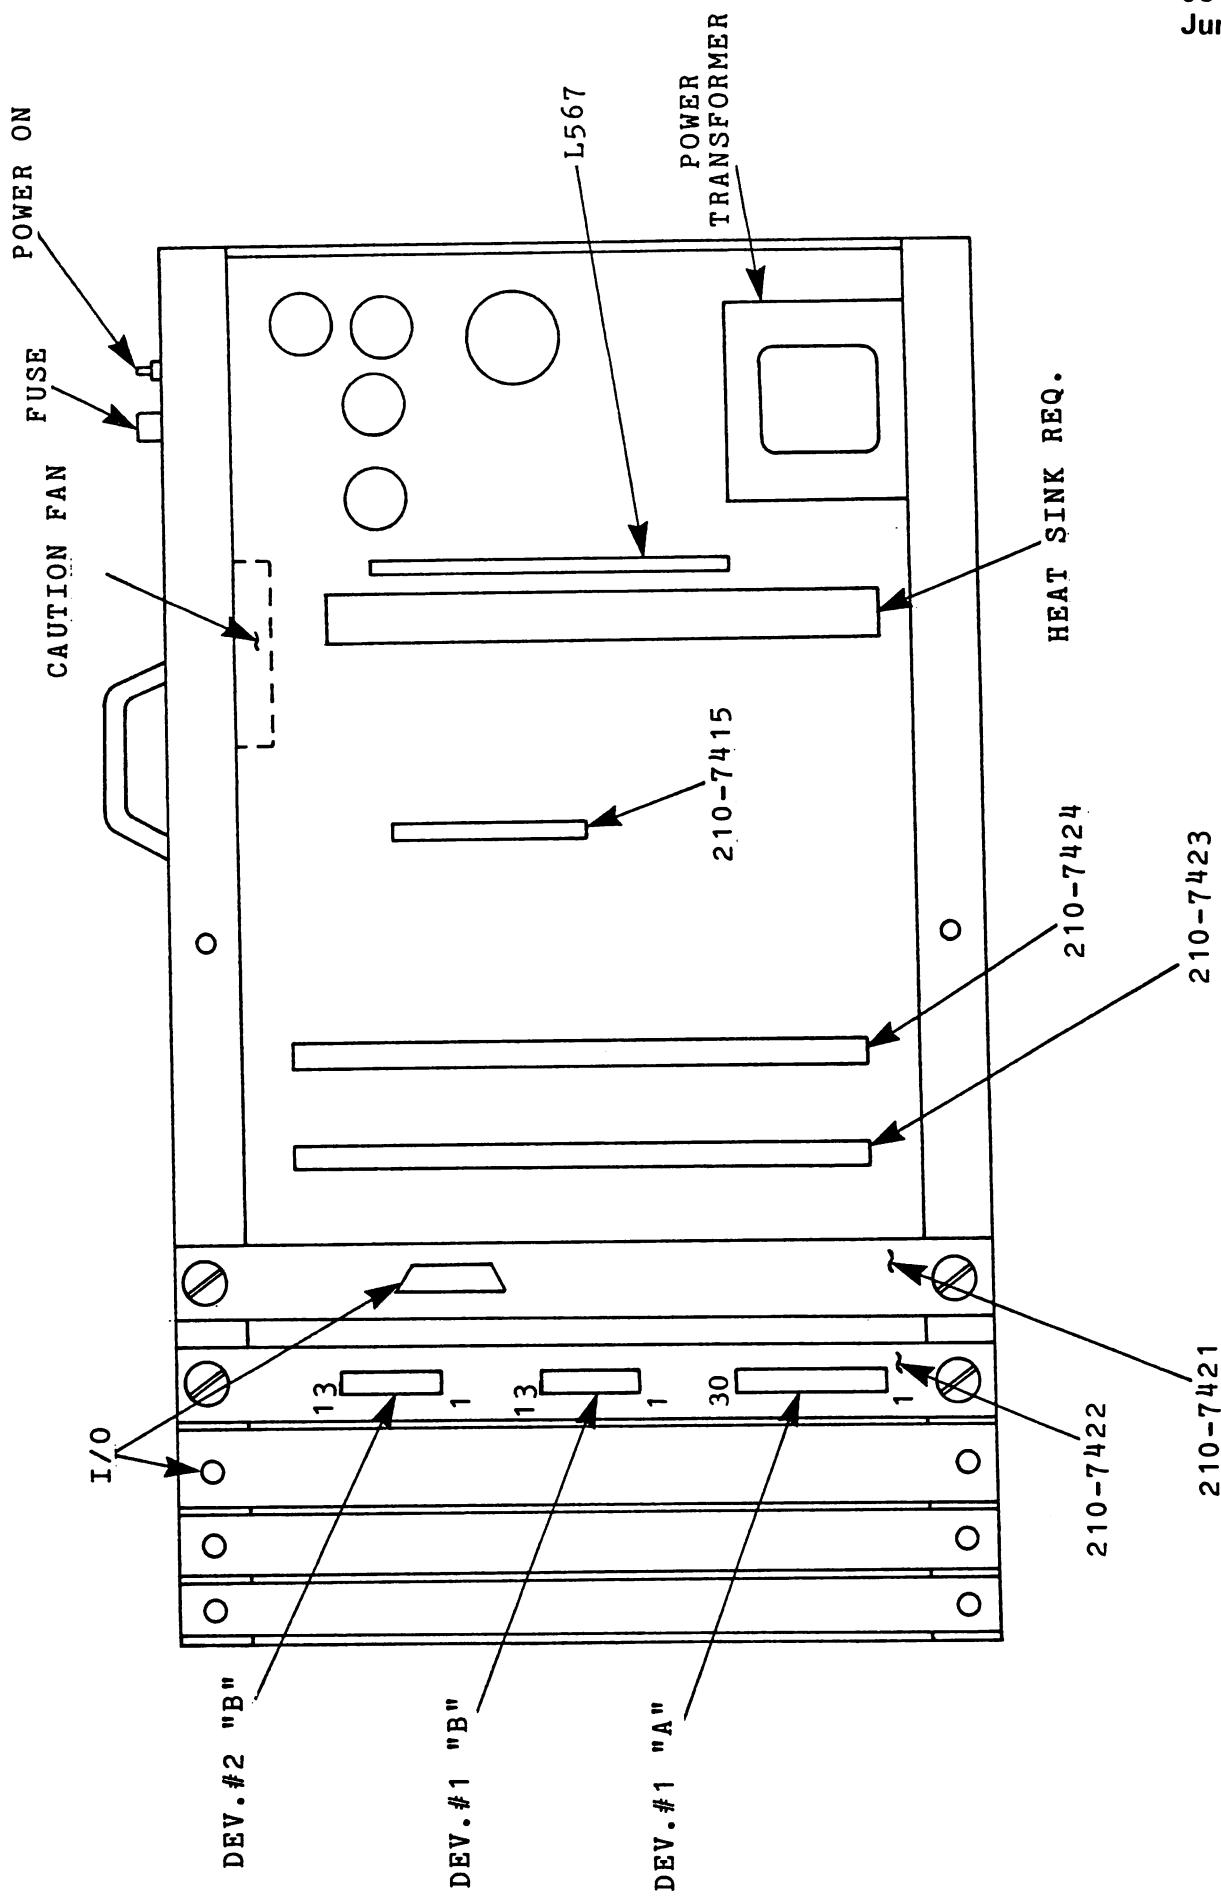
2280 MICROPROCESSOR - LAYOUT
